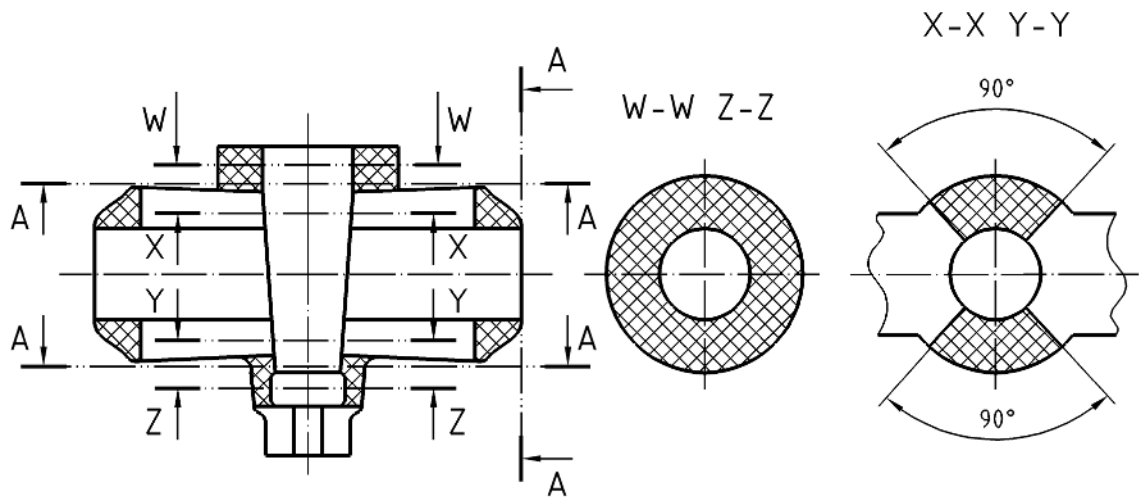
Typical casting section showing required radiographic examination of plug valve body
